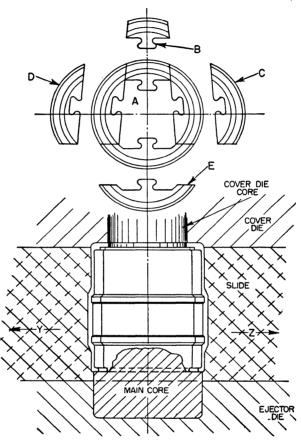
The die members necessary to cast this part include a collapsible core, consisting of four main parts, and two side slides, Y and Z, that must be moved in the direction of the arrows prior to ejecting the part.
